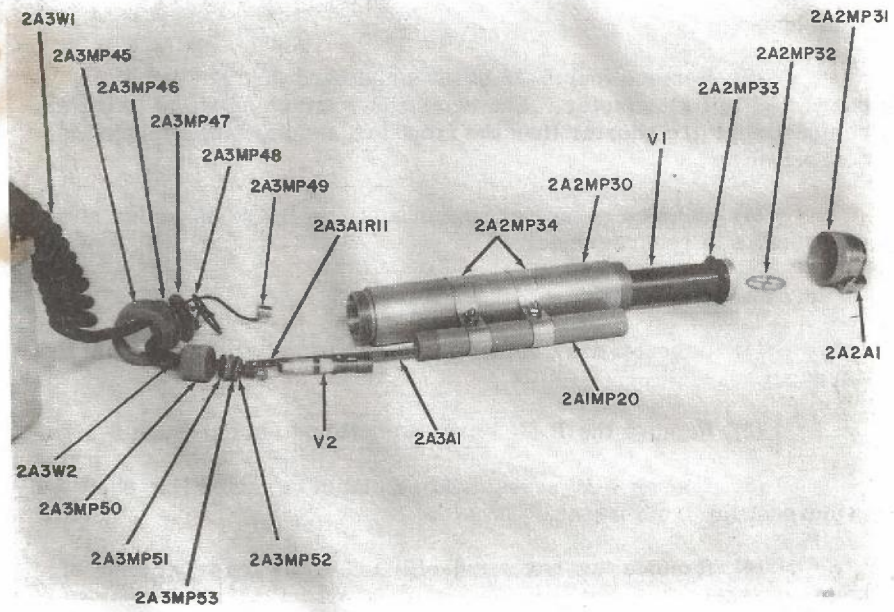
Radiac Probe DT-613/PDR-27S Disassembled
